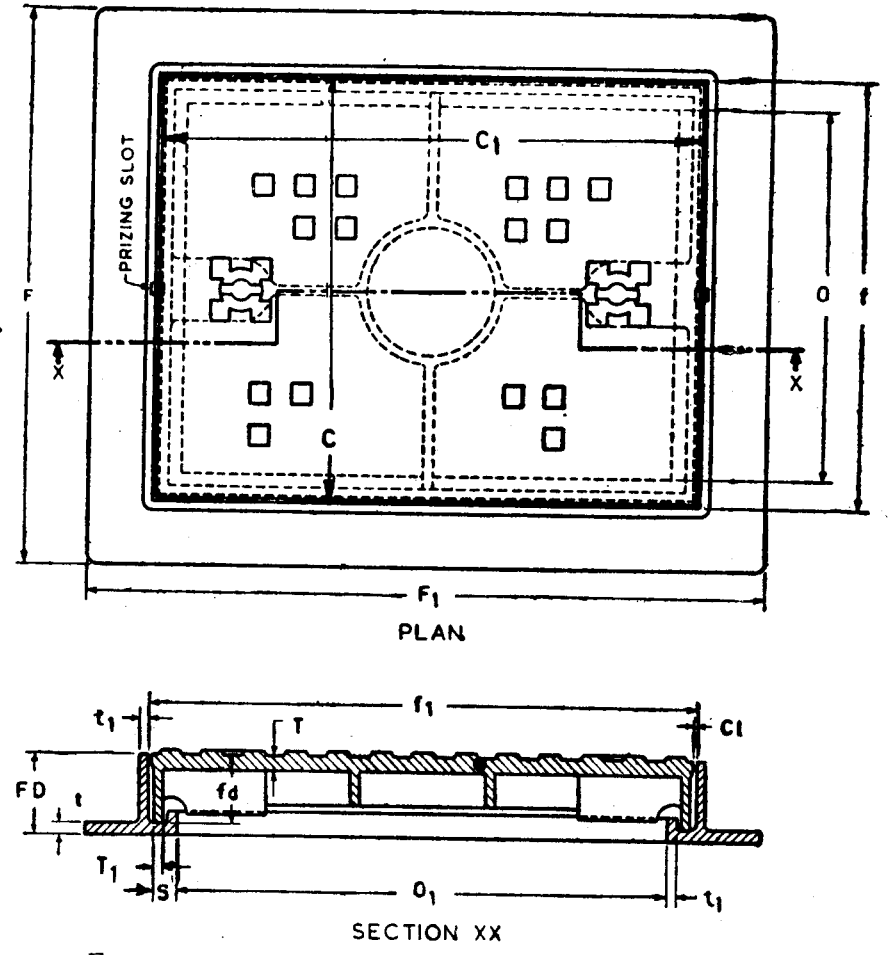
TYPICAL MD/HD/EHD RECTANGULAR MANHOLE COVER AND FRAME
